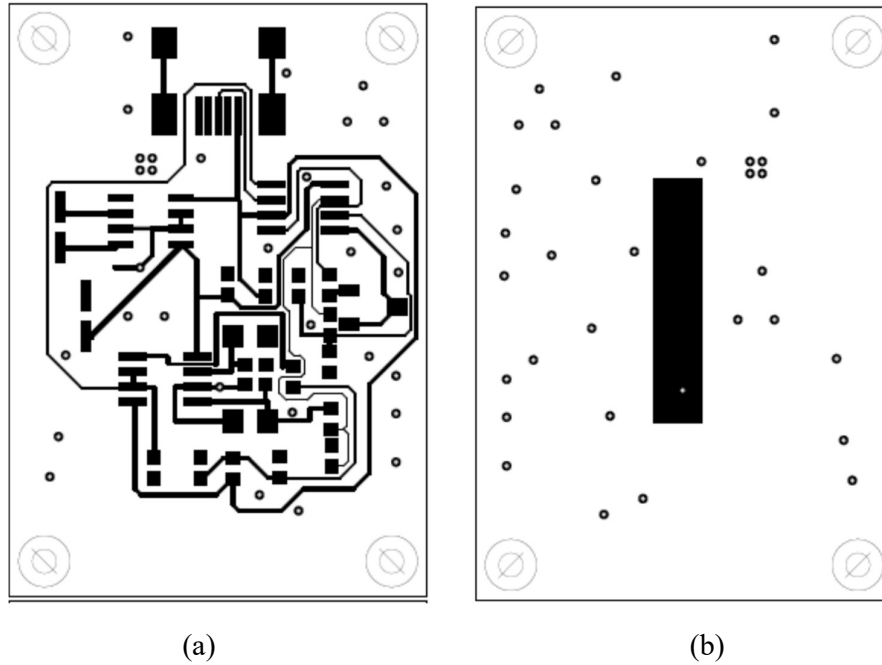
Signal conditioning PCB layout. (a) Top layer. (b) Bottom layer (2:1).
